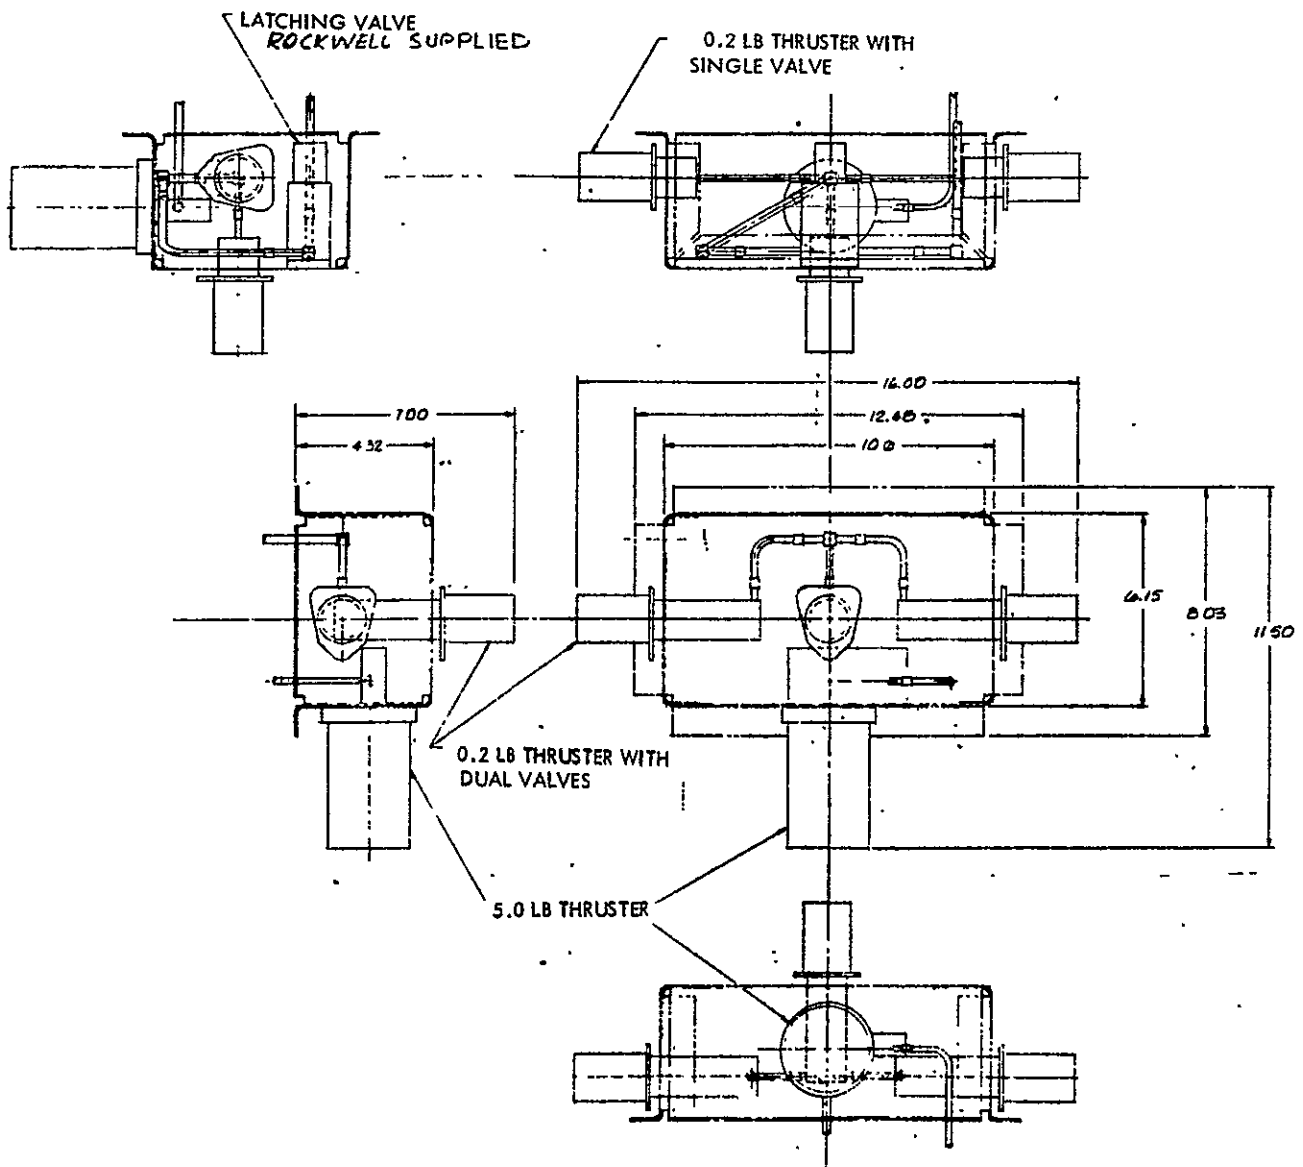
Concept--Module Assembly Rocket Engine, SPS-I
